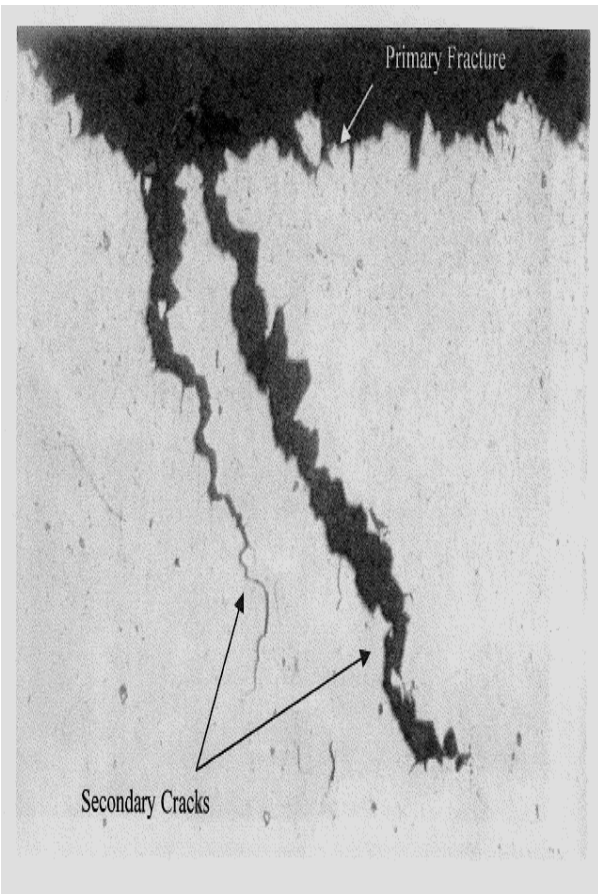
Cross-section of the fracture of specimen W2. Intergranular secondary cracks, located near the center of axis, were evident.
